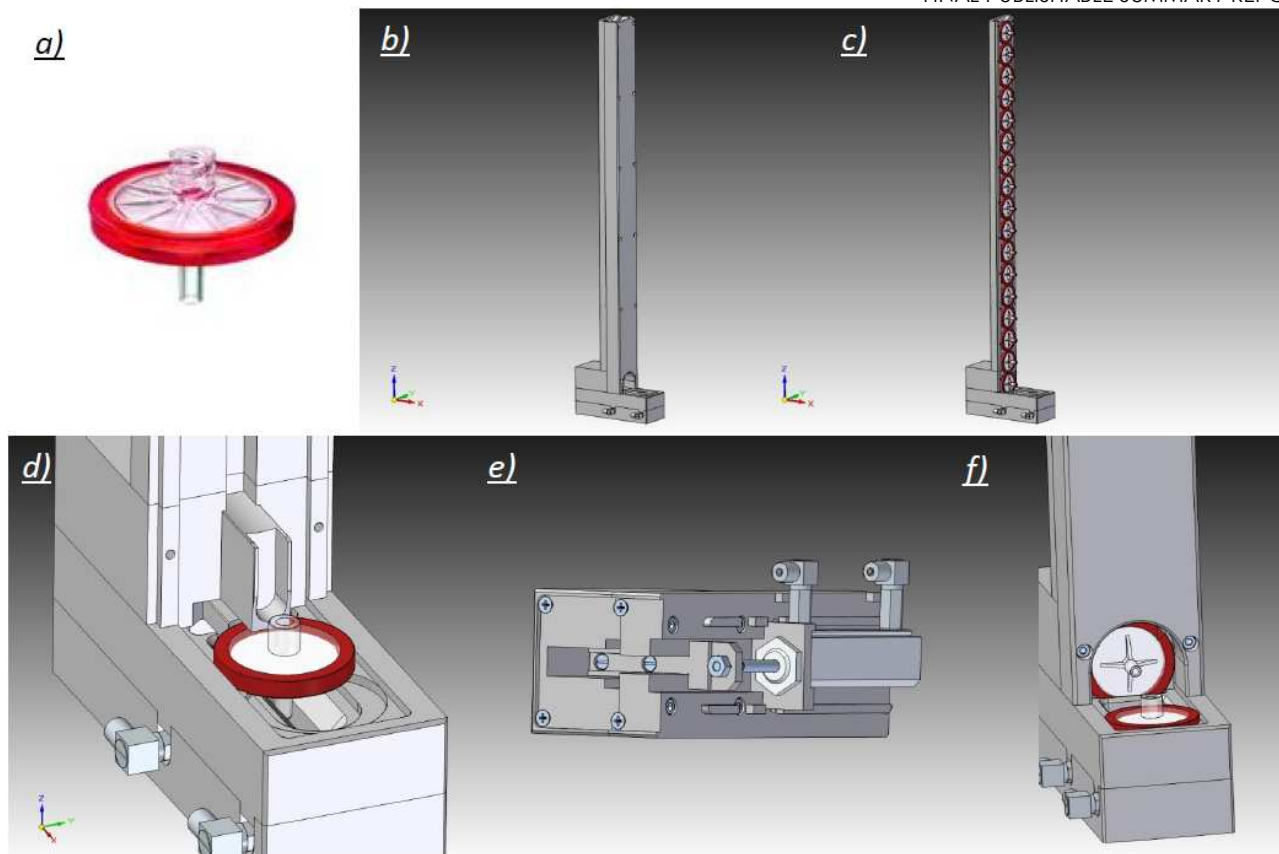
Safegrape In-Line prototype syringe filters vending element
